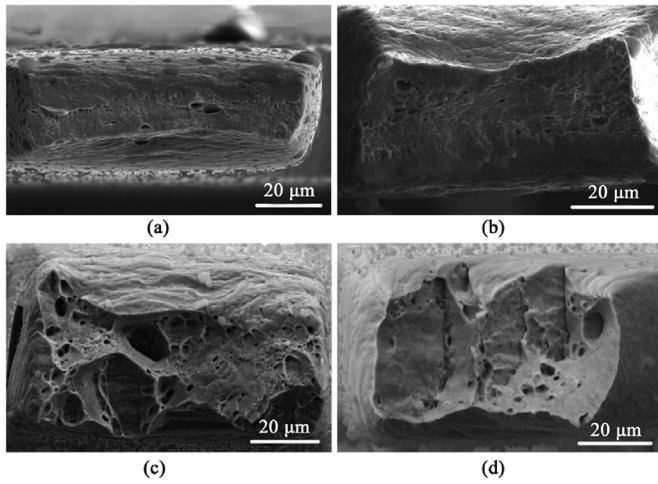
Fracture surfaces of the micro-tensile specimens tested in (a) RD, (b) TD, (c) ND, and (d) ID.
